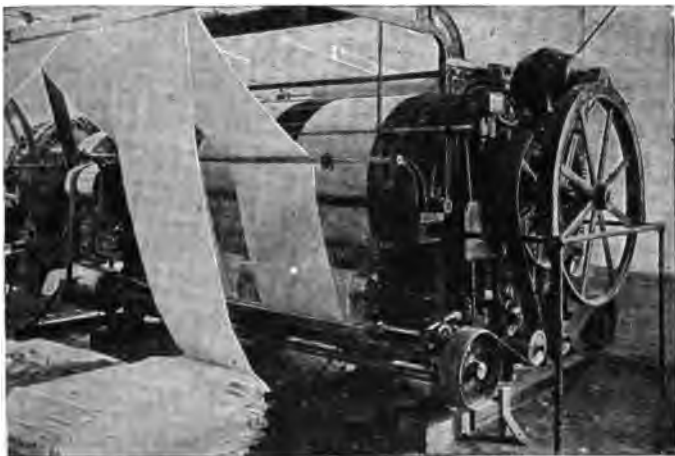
Sec. 10rr.—36 roll double action napper, showing driving end. Equipped with S. K. F. ball bearings.
